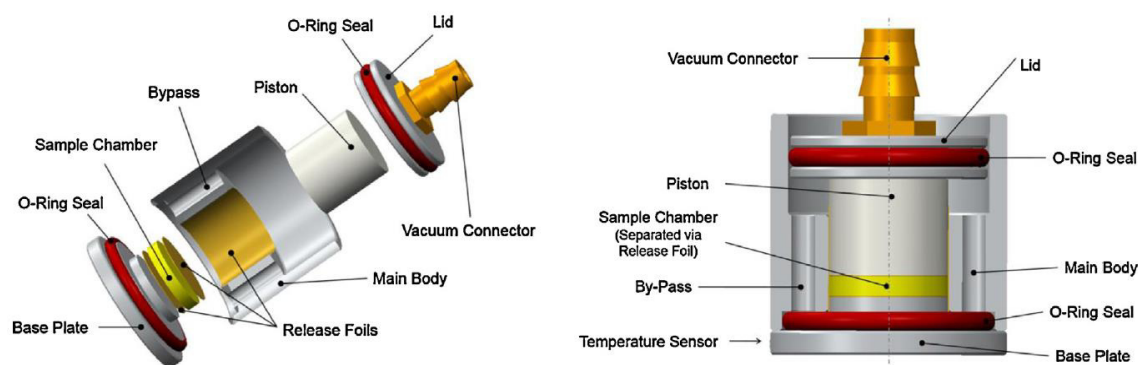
Sectional view of VCM tool; left – description of all parts, right – front view of the assembled tool [45]
